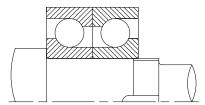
Oil Cascade and Oil Mist Lubrication -
